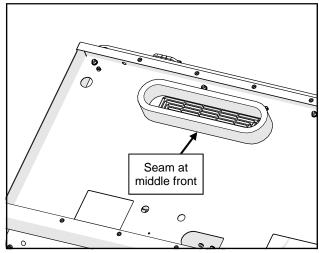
(Install Foam Around A/C Intake Vent)
